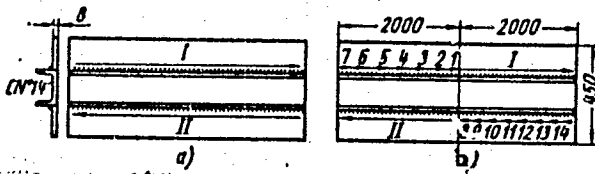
Sequence of welding passes during the welding of elements of V92T alloy
